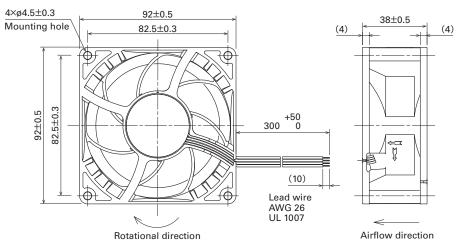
Dimensions of the San Ace 92 9RA type (Unit: mm)
